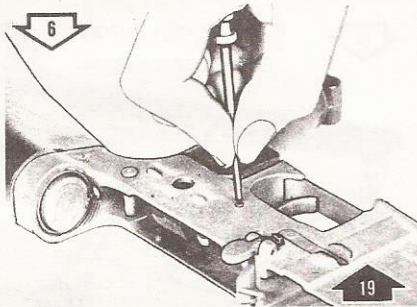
Disassembly/Assembly Lower Receiver Group (Page 1 of 5)
